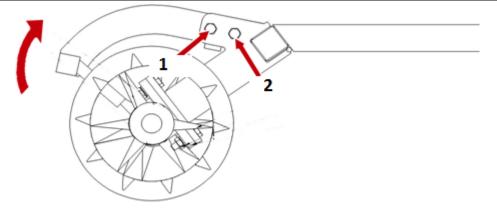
Deflection of the pin shaft cleaning comb: 1; 2 - cleaning comb attachment screws.
